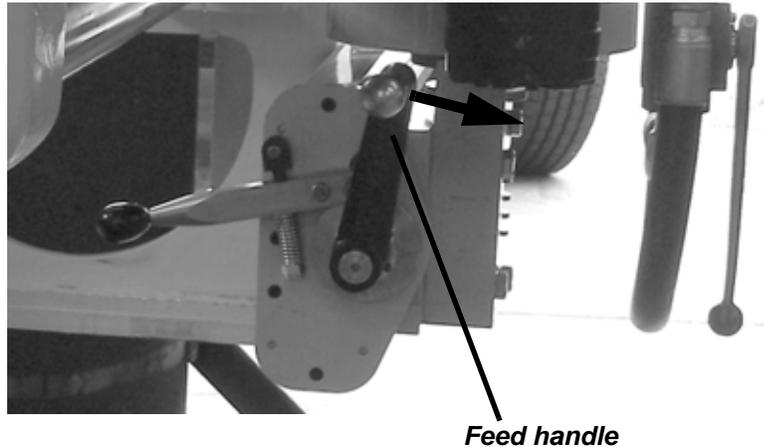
Turn the feed handle clockwise to retract the saw bow. (Note that the handle can be mounted on either end of the feed screw. Turn it counter-clockwise if it is on the saddle end of the screw.)
